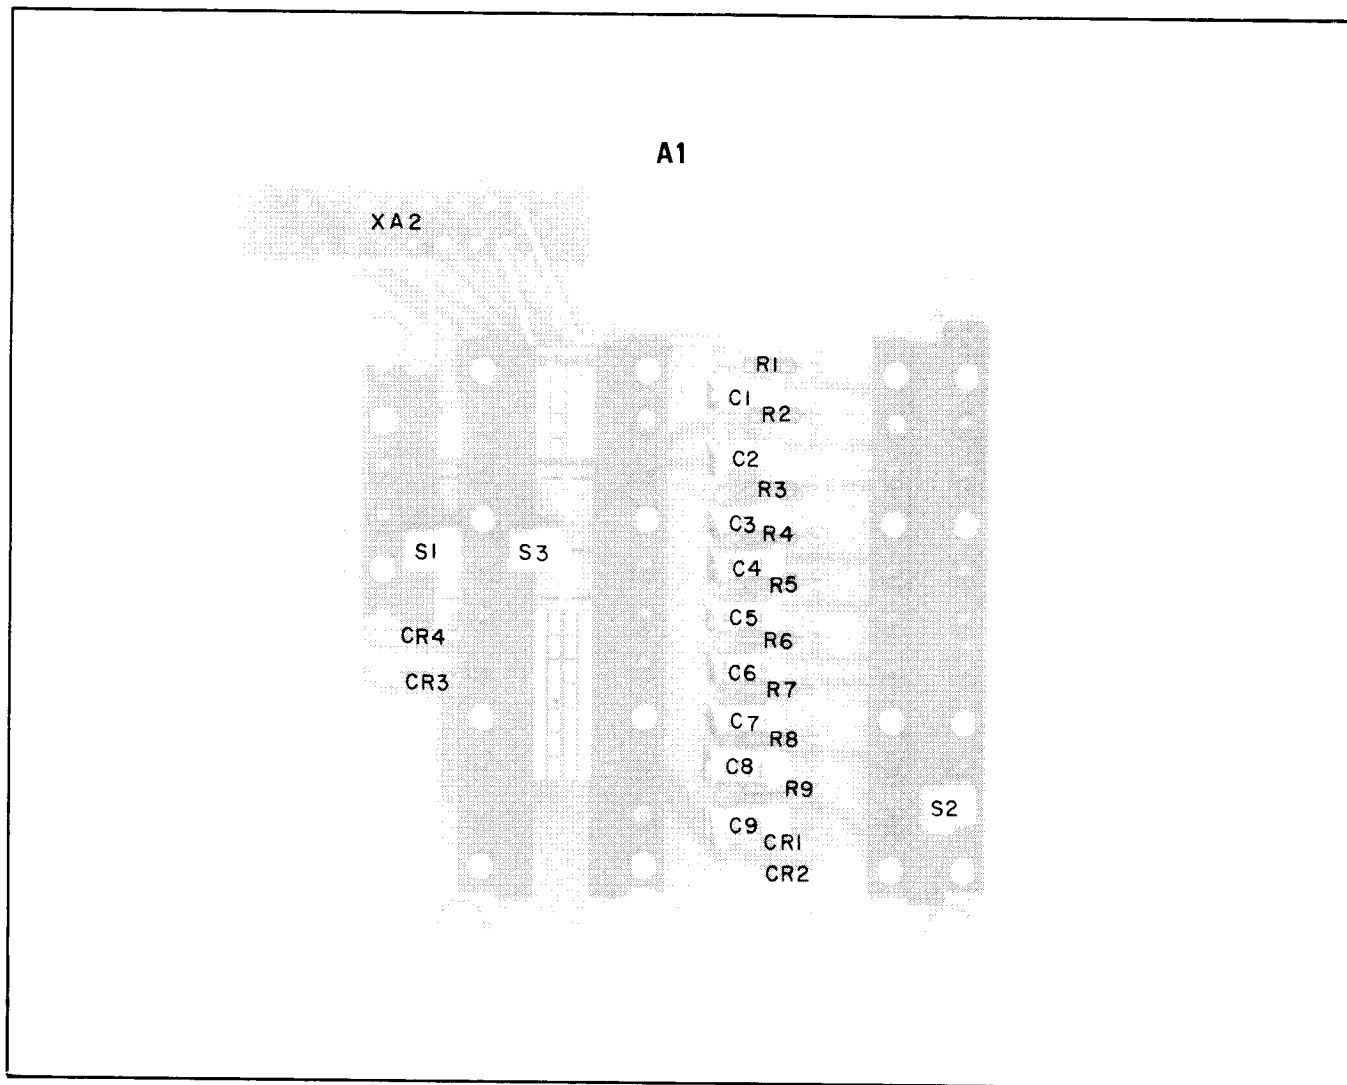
Parts Location for Front Panel Assembly A1 and A2 (1 of 2)
